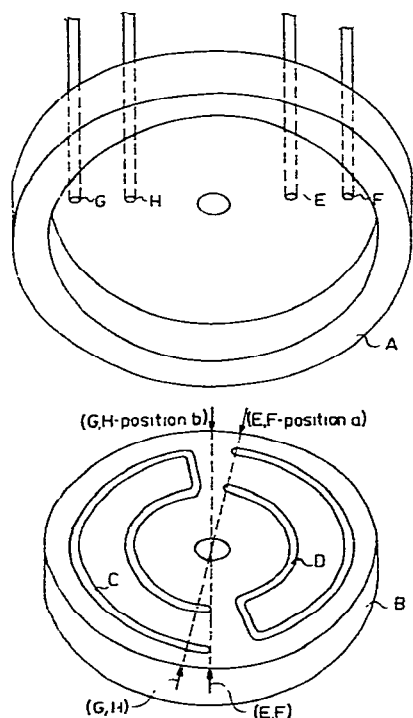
Section through the variable-volume sample valve of the disk type: A = valve body; B = rotor; C = sample groove; D = connecting groove; E = mobile phase inlet; F = mobile phase outlet; G = sample inlet; H = sample outlet; a = position of loading of the sample loop with sample at maximum injection volume; b = position of injection of sample into the mobile phase.
